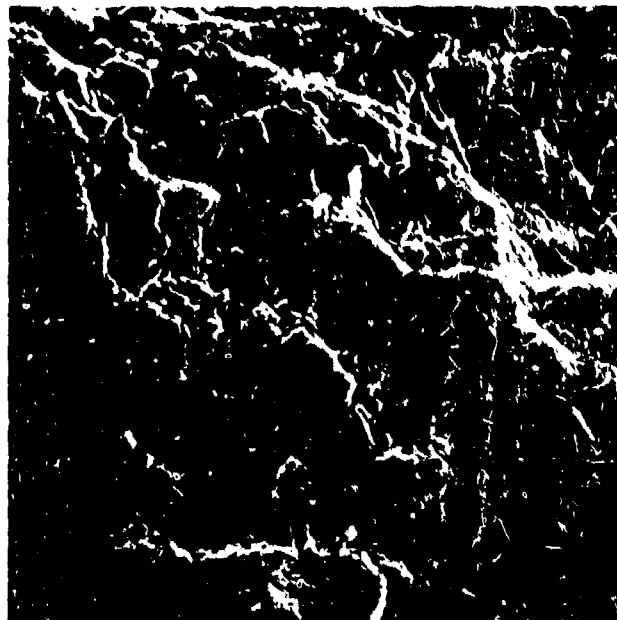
Fatigue striations on surface of a hydrogen-embrittled A-514 weld fatigue specimen, 2000x.
